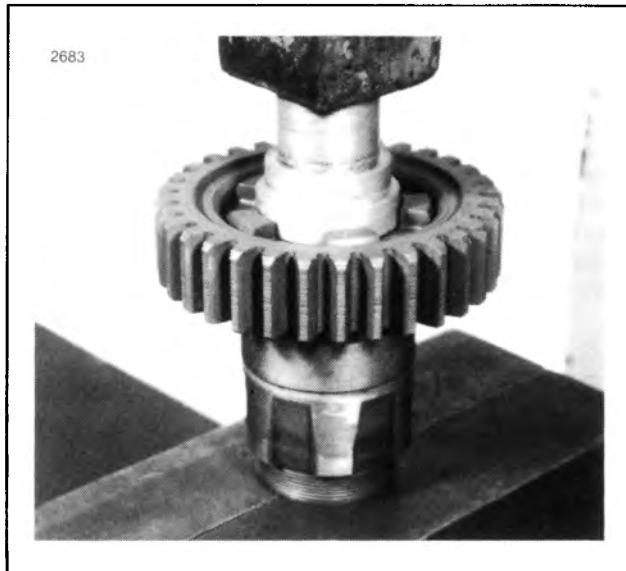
Installing Transmission Side Needle Bearing in Main Drive Gear
